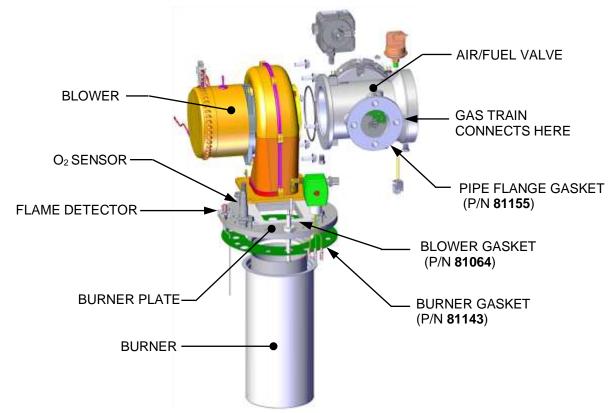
Burner Assembly Exploded View – BMK750/1000
